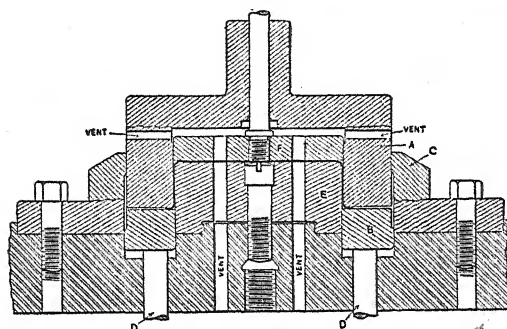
Combination Blanking and Drawing Die to Produce Part A, Fig. 32.
